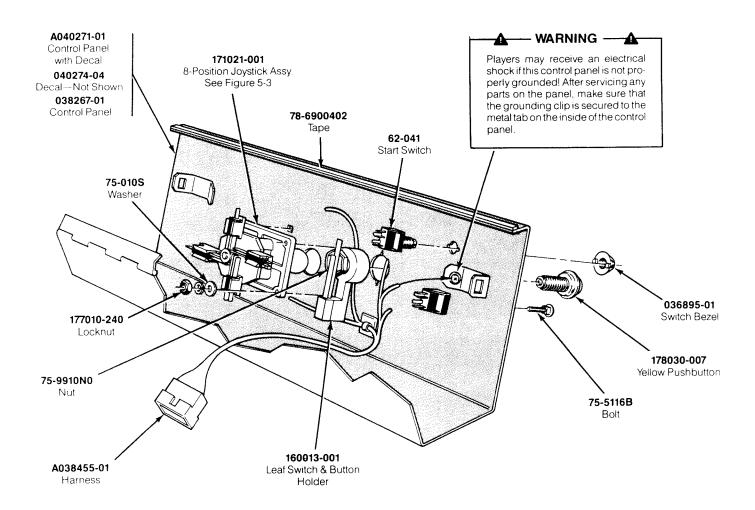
Control Panel Assembly A040270-01 A Parts List
